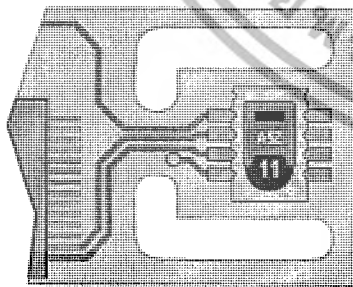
Top view of example of mounted SHT1x with slits milled into PCB to minimize heat transfer.
